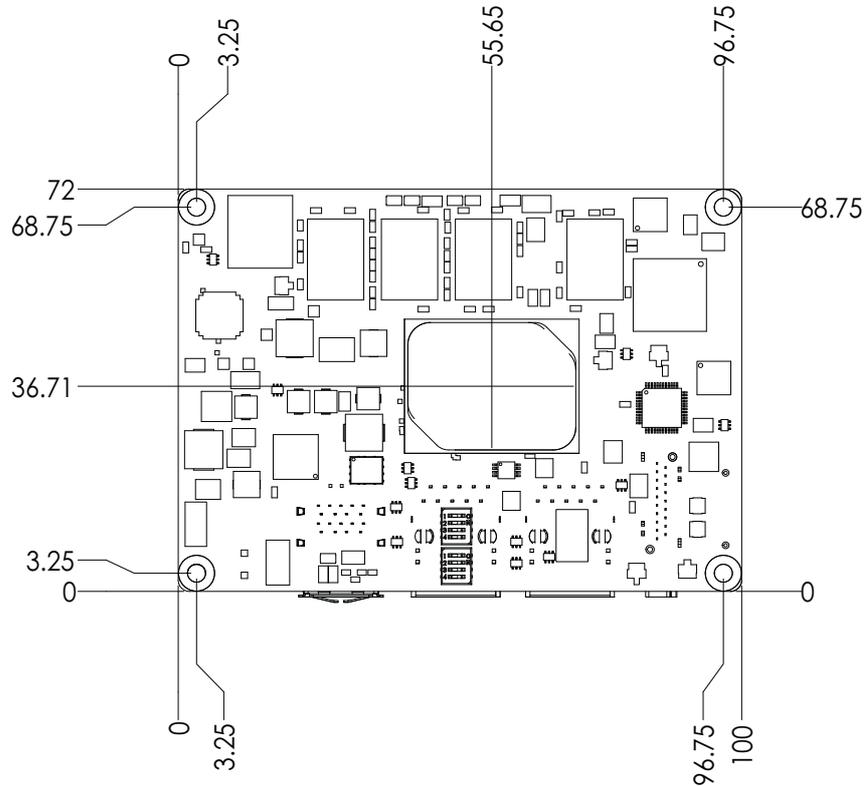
MIO-2361 Mechanical Drawing (Top Side)
